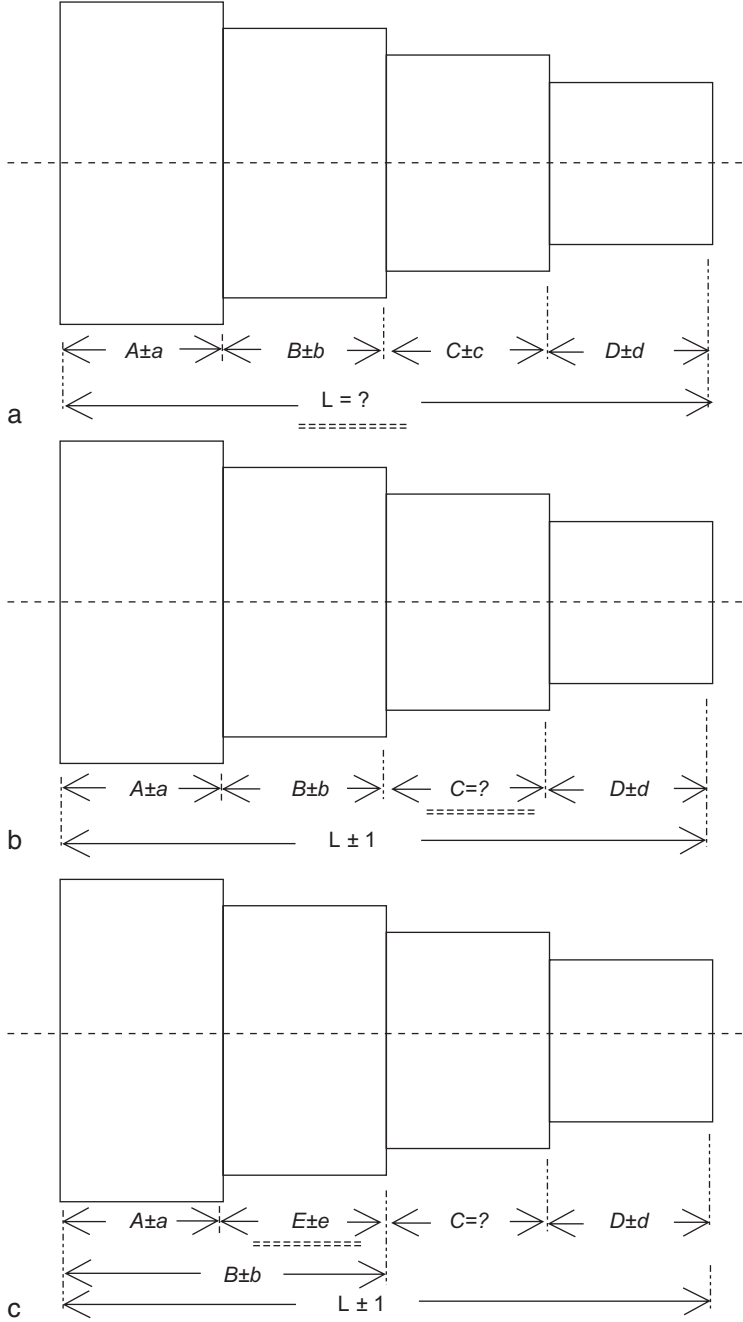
Dimensioning method effect on tolerance stack-up
